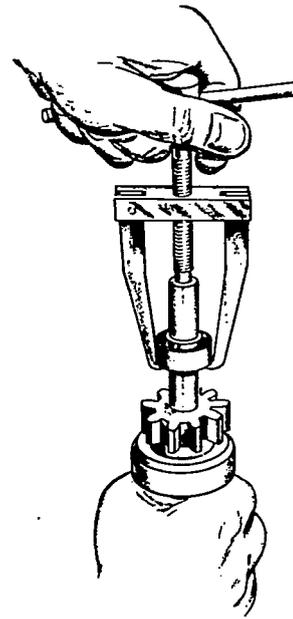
MOUNTING OVERRUNNING CLUTCH
